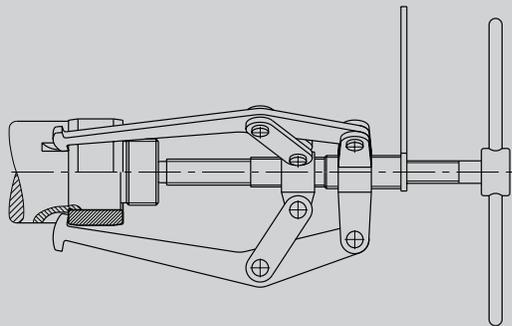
Dismounting of Inner Ring of Cylindrical Roller Bearing by using a Extraction Tool
